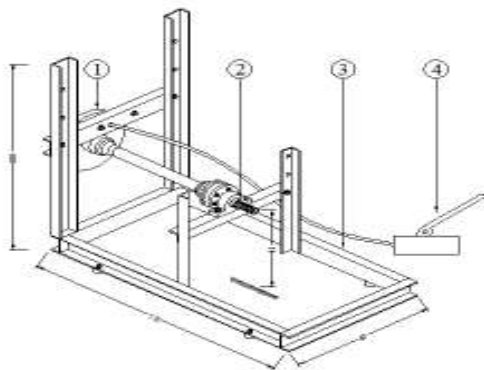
Dimensions of frame for loading unit (1: disk brake, 2: PTO adaptor, 3: frame and 4: Hand for pulling brake wire).
